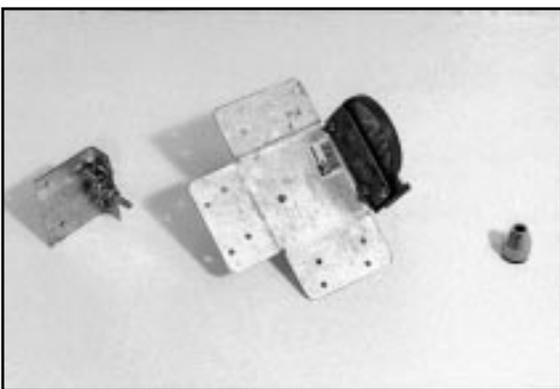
Completed Sub-assemblies. This photograph shows the completed base plate with 0.25" x 20 threaded shaft extension in place. The bracket for the blast deflector and angle indicator (center of the view) is placed under the hex nut and lock washer shown on the top of threaded stud on the left. The 0.25" keyless drill chuck is threaded onto the remaining portion of the stud that protrudes through this support.
